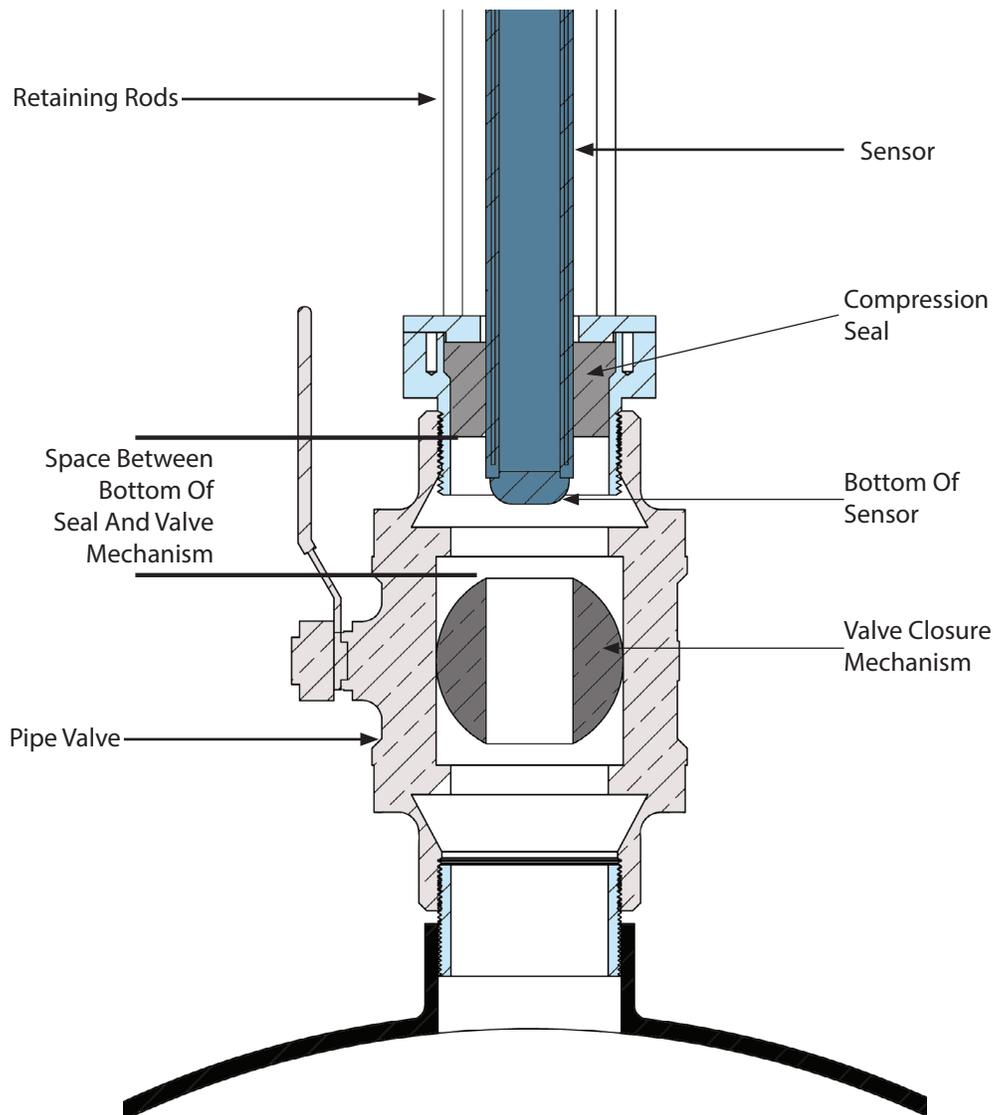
Cross-Section Of Meter Showing Sensor Removal
